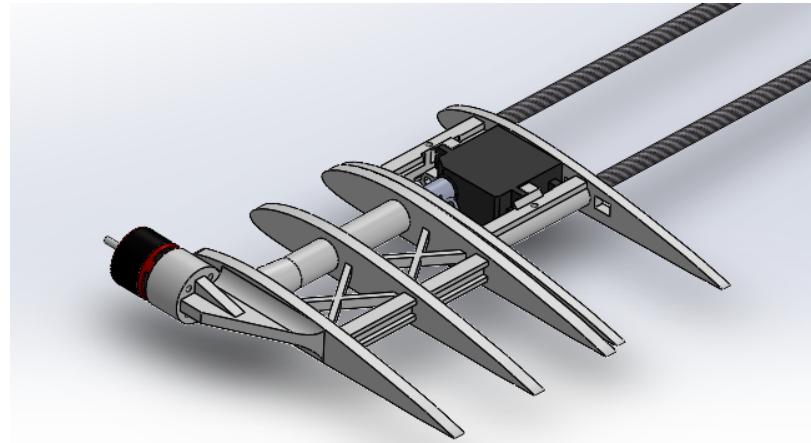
B. Left Wing Tilt Rotor in Horizontal Flight
